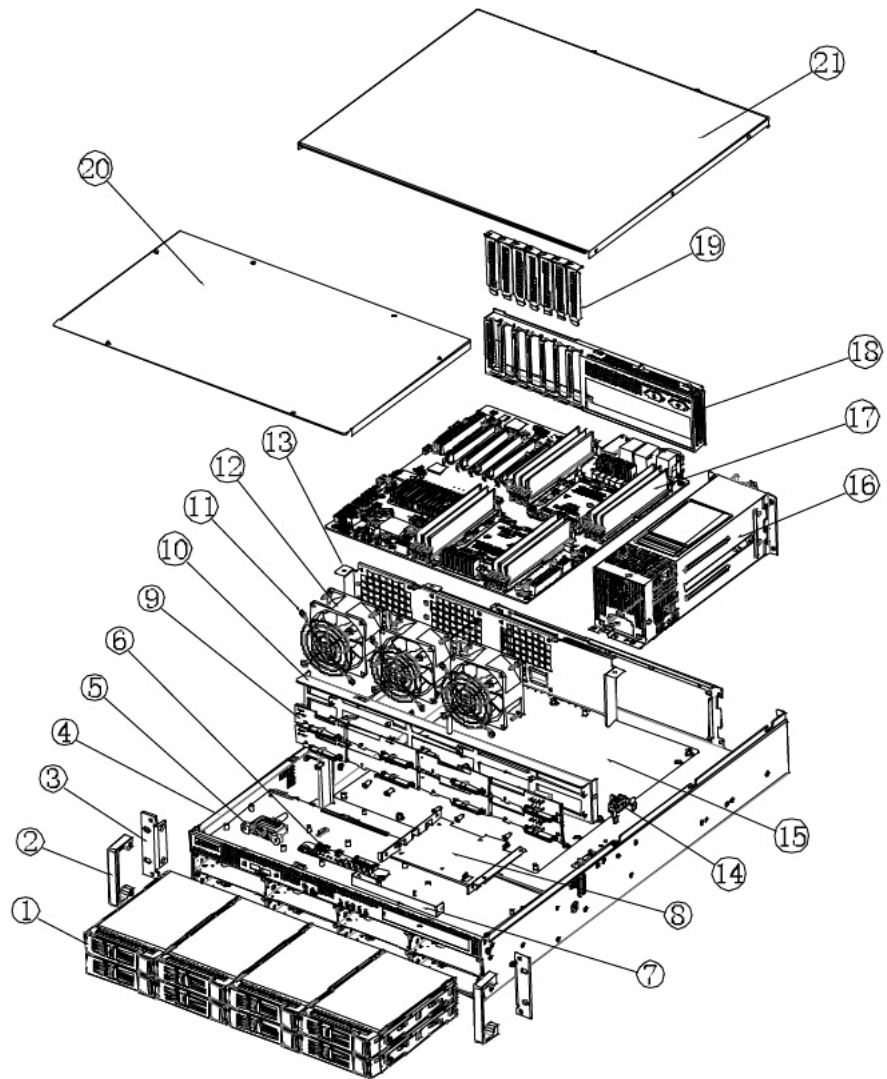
Exploded diagram and parts list/ 分解图 & 部件列表 / 分解圖 & 零件表
